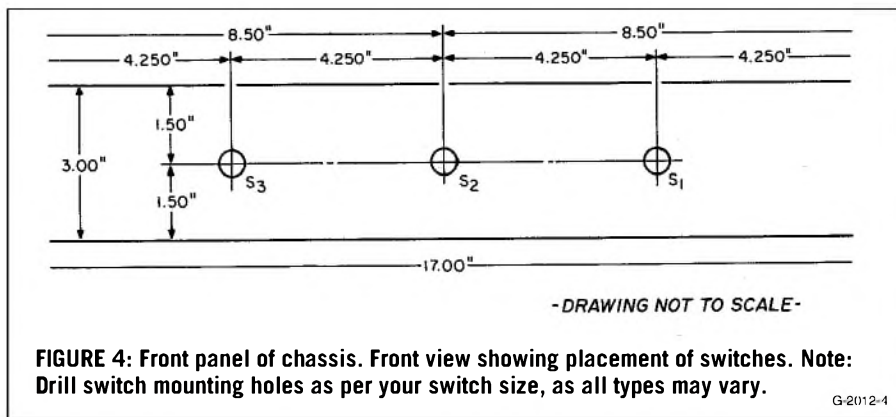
Front panel of chassis. Front view showing placement of switches. Note: Drill switch mounting holes as per your switch size, as all types may vary.
